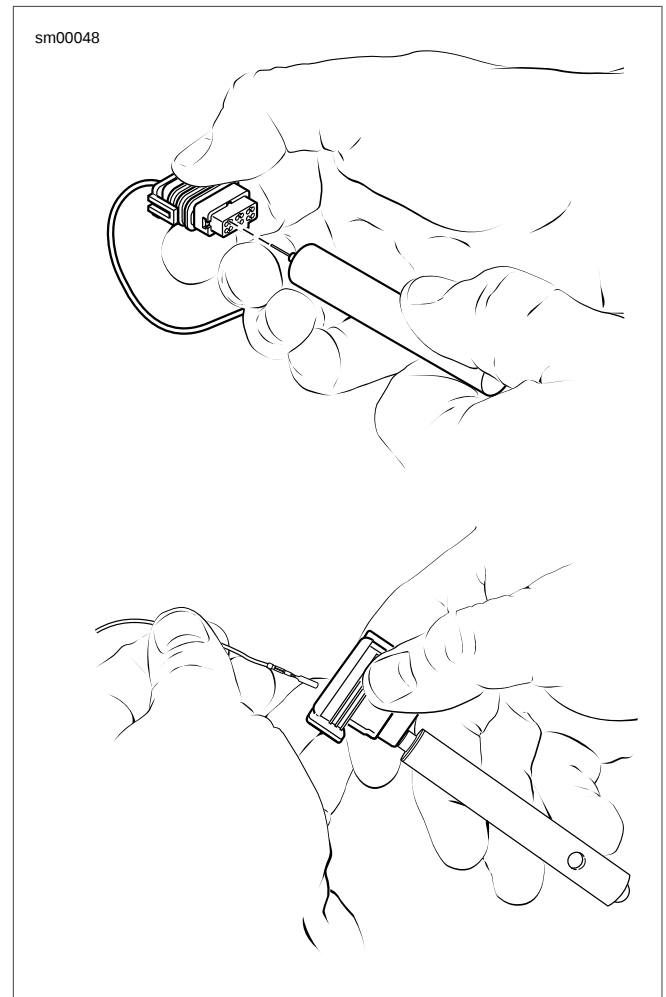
Delphi Micro-64 Sealed Connector: Insert Tool and Remove Terminal
